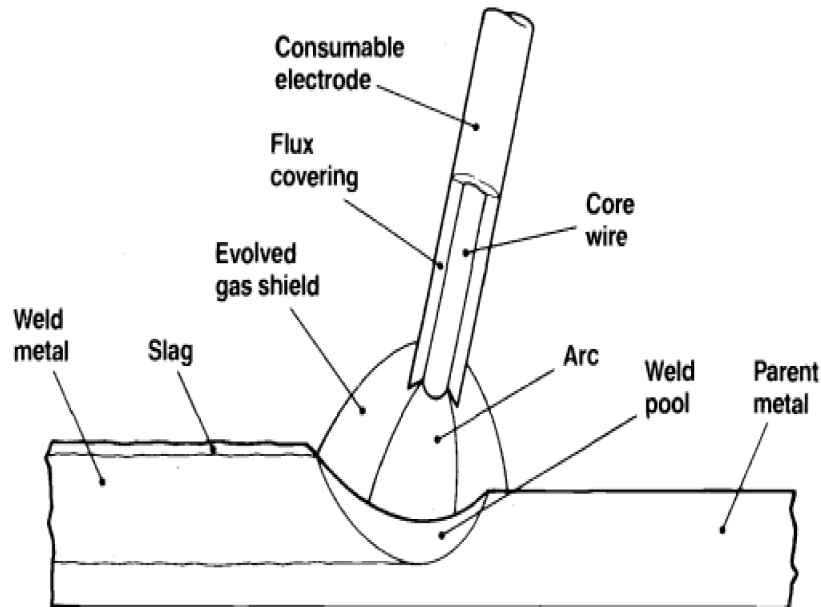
Shielded metal arc welding (SMAW) or manual metal arc welding (MMA) [54].
